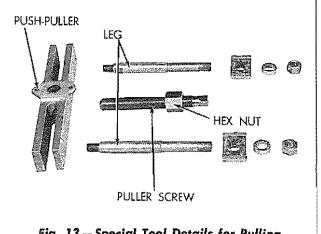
Special Tool Details for Pulling _ Bevel Gear Shaft
